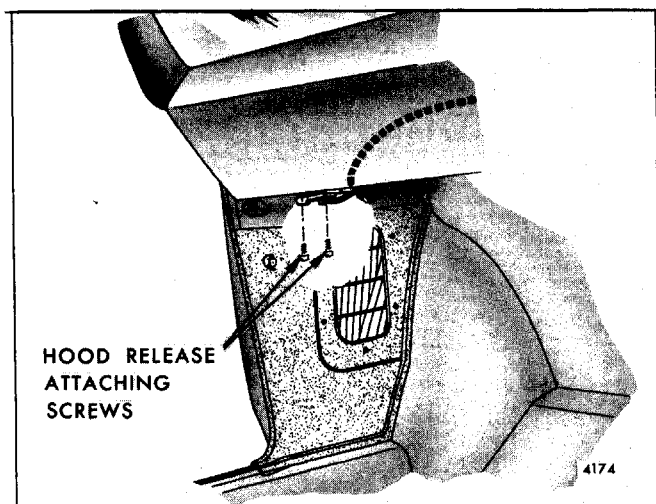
Hood Latch Release Assembly Attachment - "H" Body (Less "07,27" Style)
